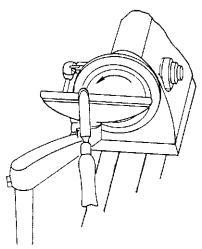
To shape the inside of a faceplate turning, position the tool rest in front of the stock, just below the center. Feed your chisels against the "down" side of the workpiece. This will help hold the tool against the tool rest.
